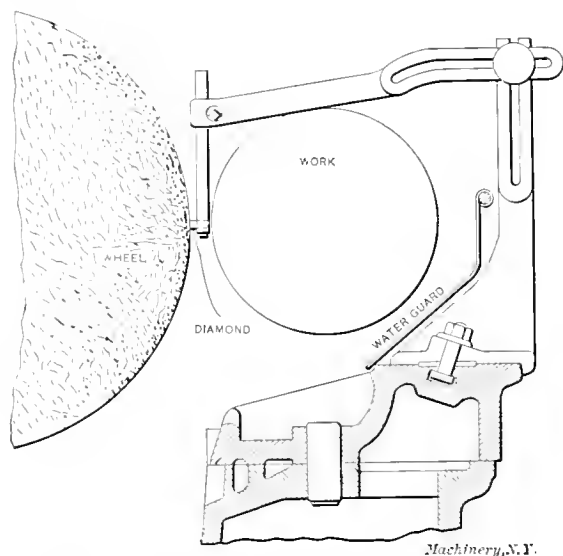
Fixture for Truing Emery Wheel with Diamond
